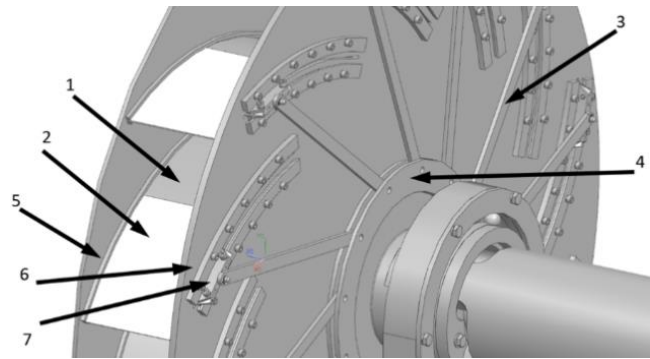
Impeller geometry with tie rods mechanism—parts mounted to the impeller
